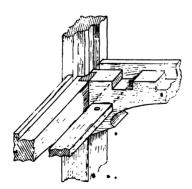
Shaped Rails fixed to Posts of Plant Stand.
